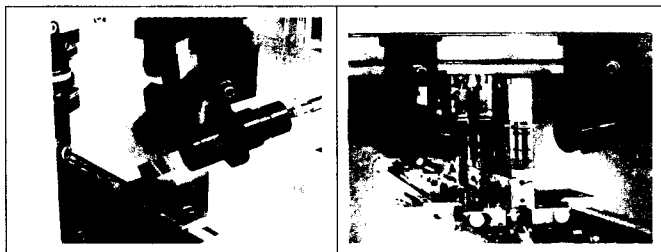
An example of condensing optic system for laser spot welding
